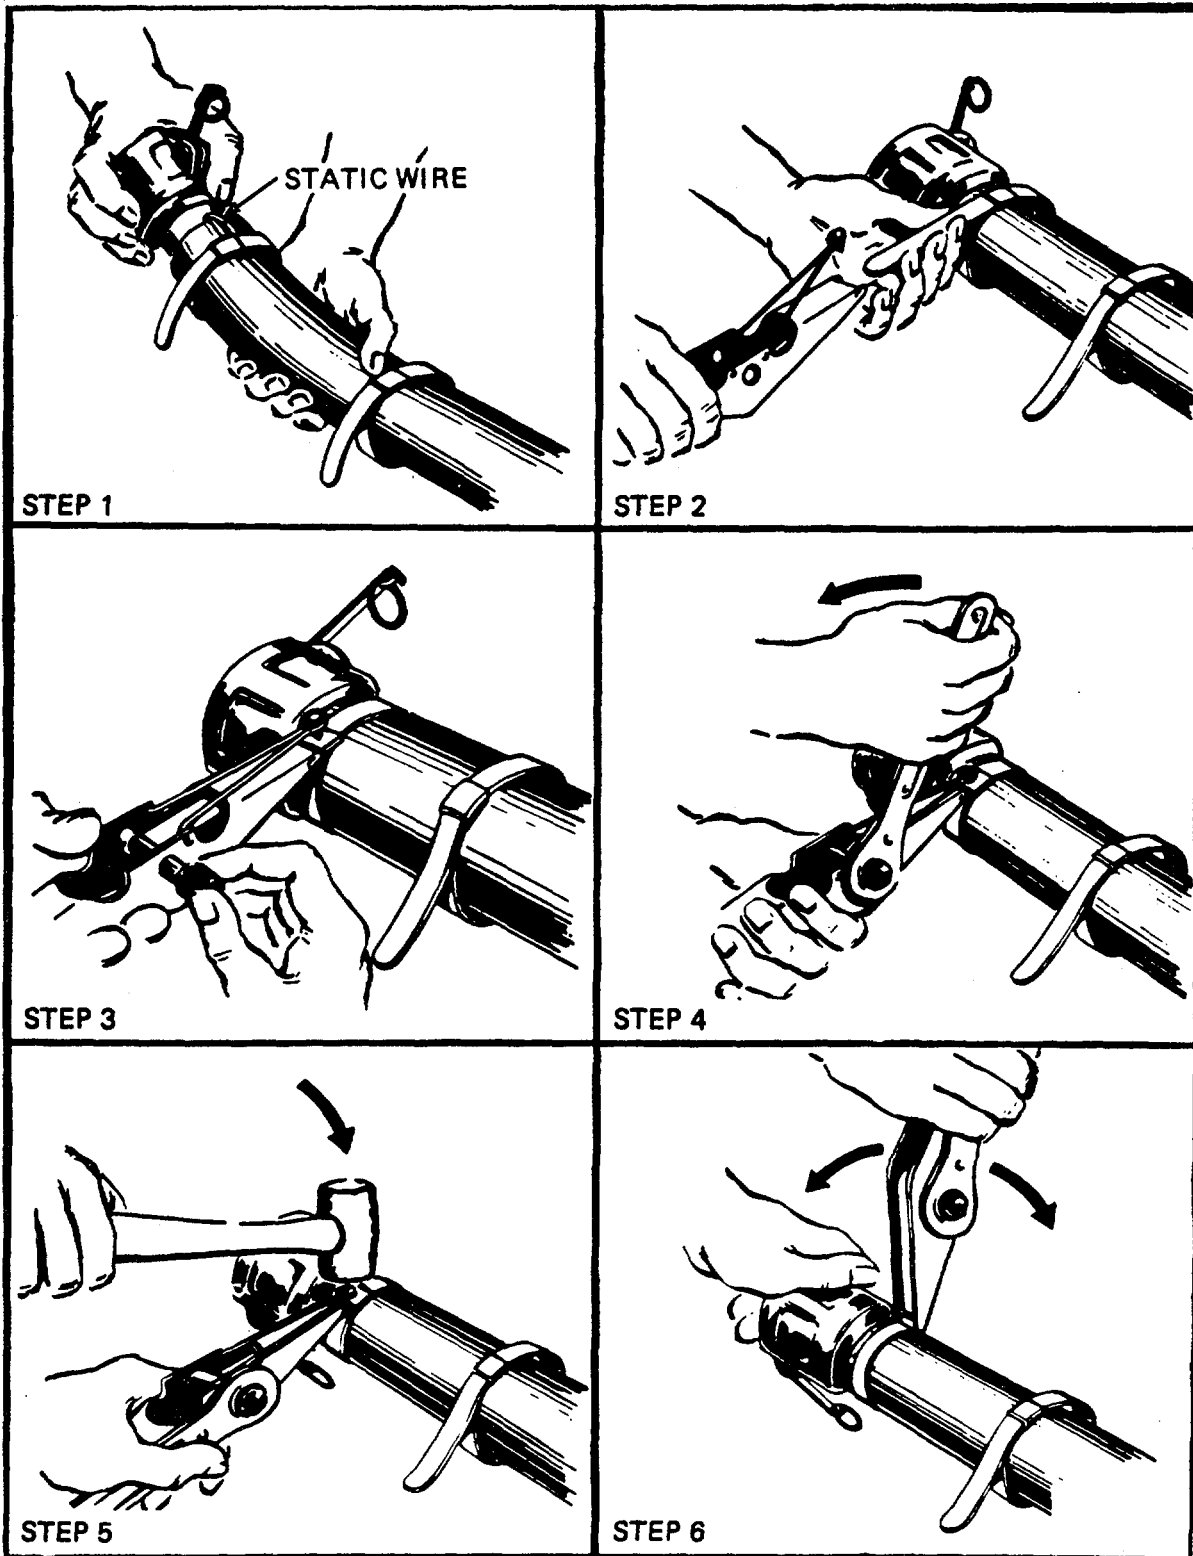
Clamp Installation Using Clamping Tool (Appendix B, Item 2).
